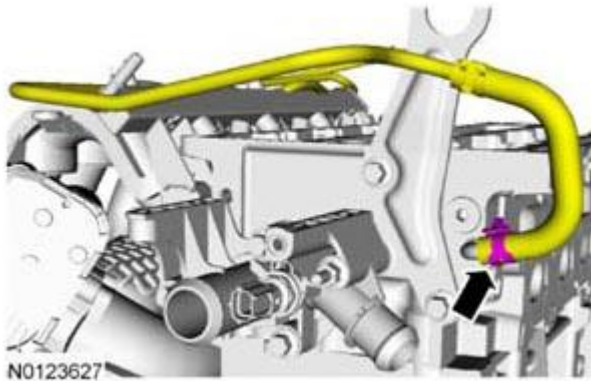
Locating Coolant Return Hose To Cylinder Head
